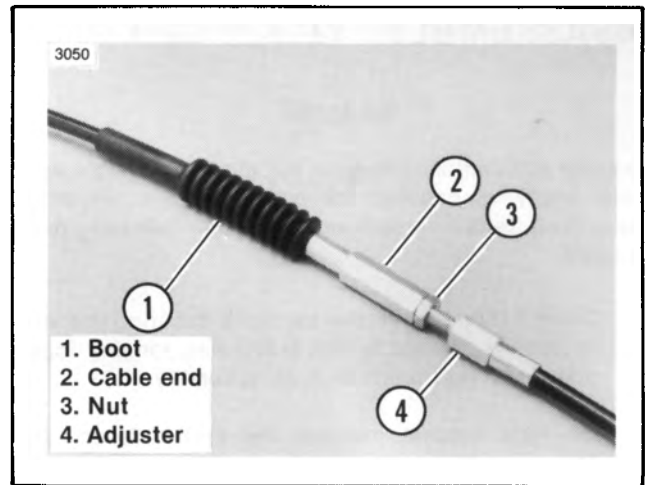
Clutch Cable Adjuster — 1987-1989
